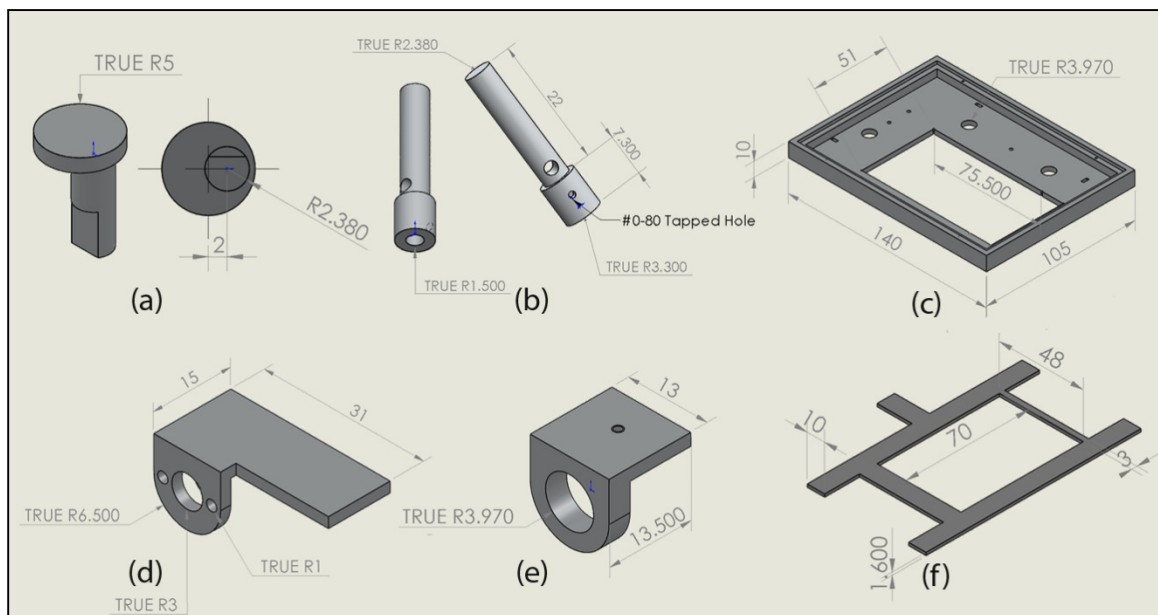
Designed and fabricated parts. Lengths in mm. (a) Eccentric cam with diameter of 1cm and de-center of 2mm. (b) Worm-drive “coupler”, connects motor shaft to worm. (c) Platform bottom, waveguide and solar cell attached via optical adhesive. (d) Motor mount. (e) Worm-drive “coupler” mount. (f) Plastic shim that attached to platform top that keeps lens array in contact with platform bottom.
